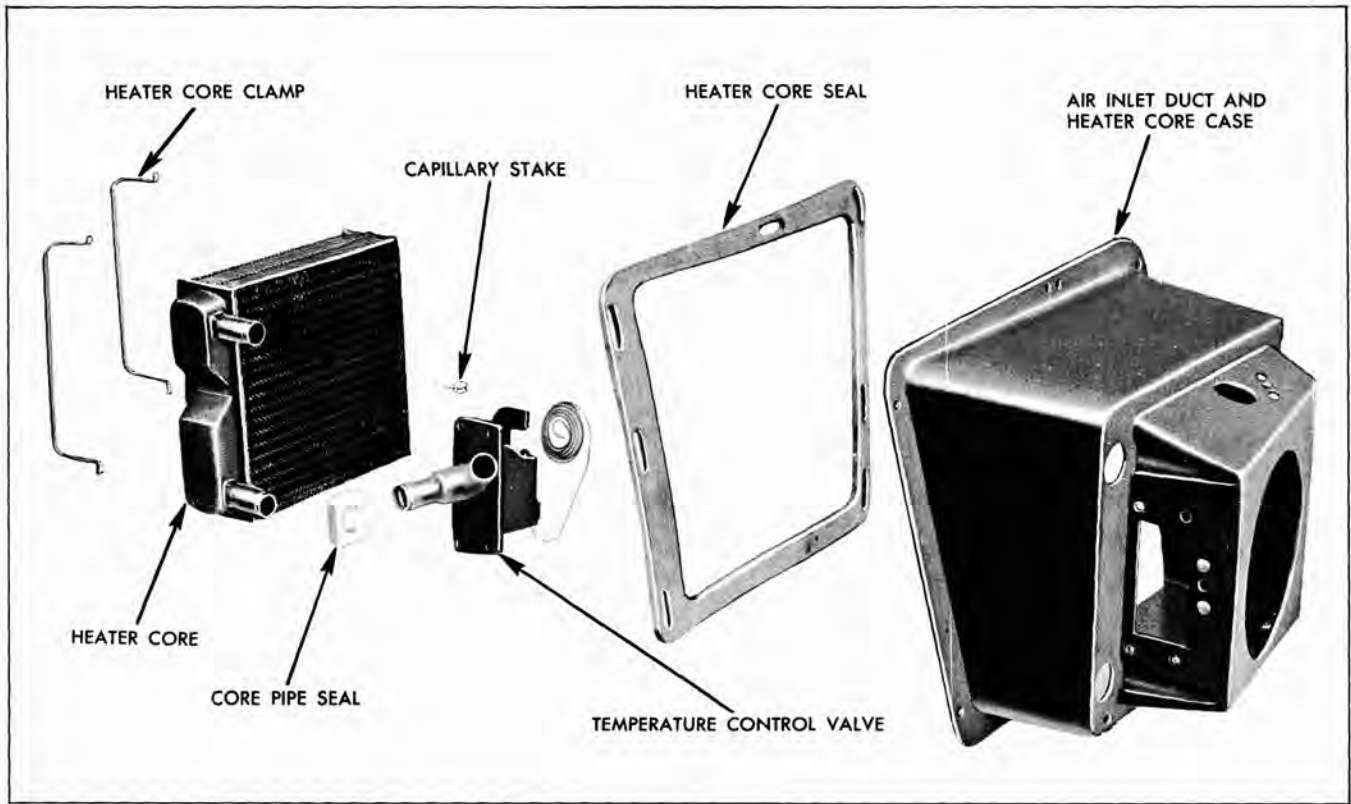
Tempest Heater Air Inlet and Core Case Assembly—Exploded View
